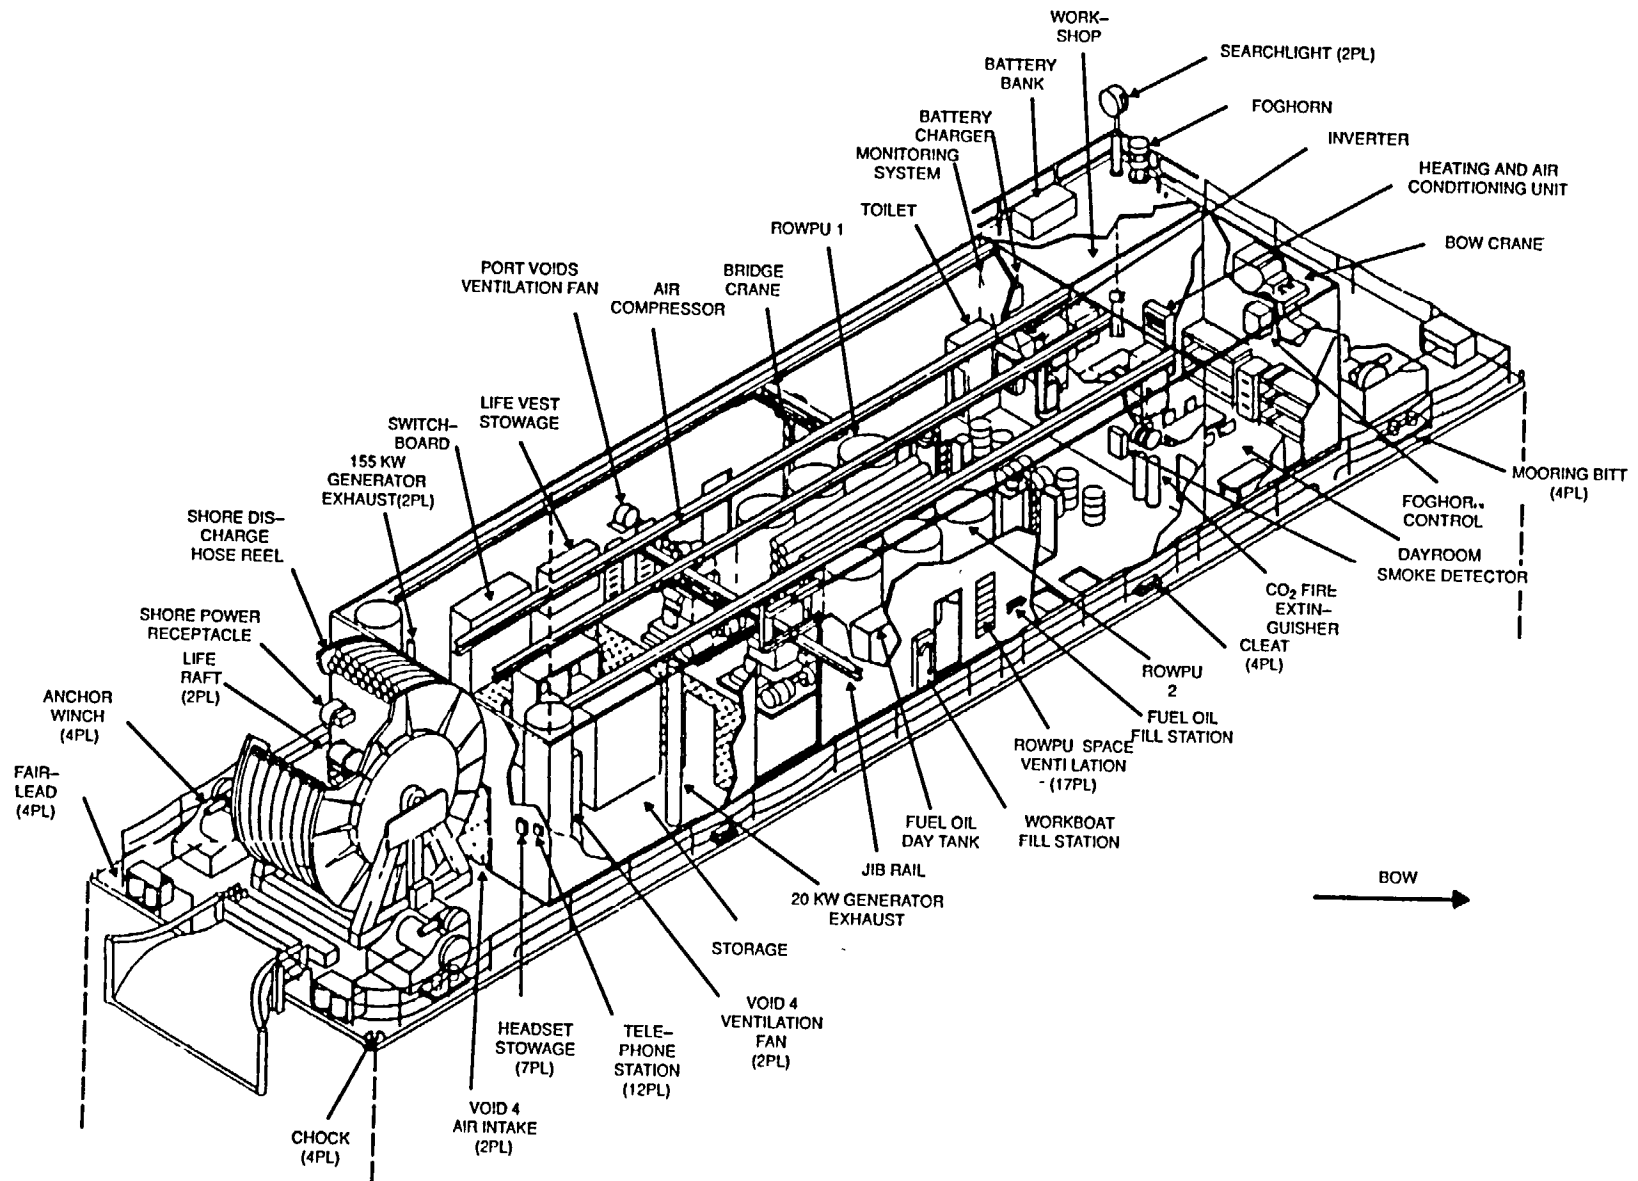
Major Components of ROWPU Barge Systems and Equipment - Deckhouse (Sheet 2 of 3)
